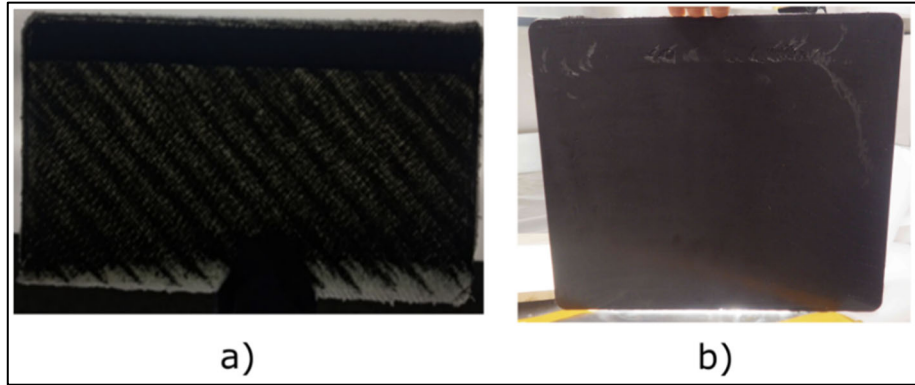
a) The casting mold used, b) Casting of 3%wt on the mold
